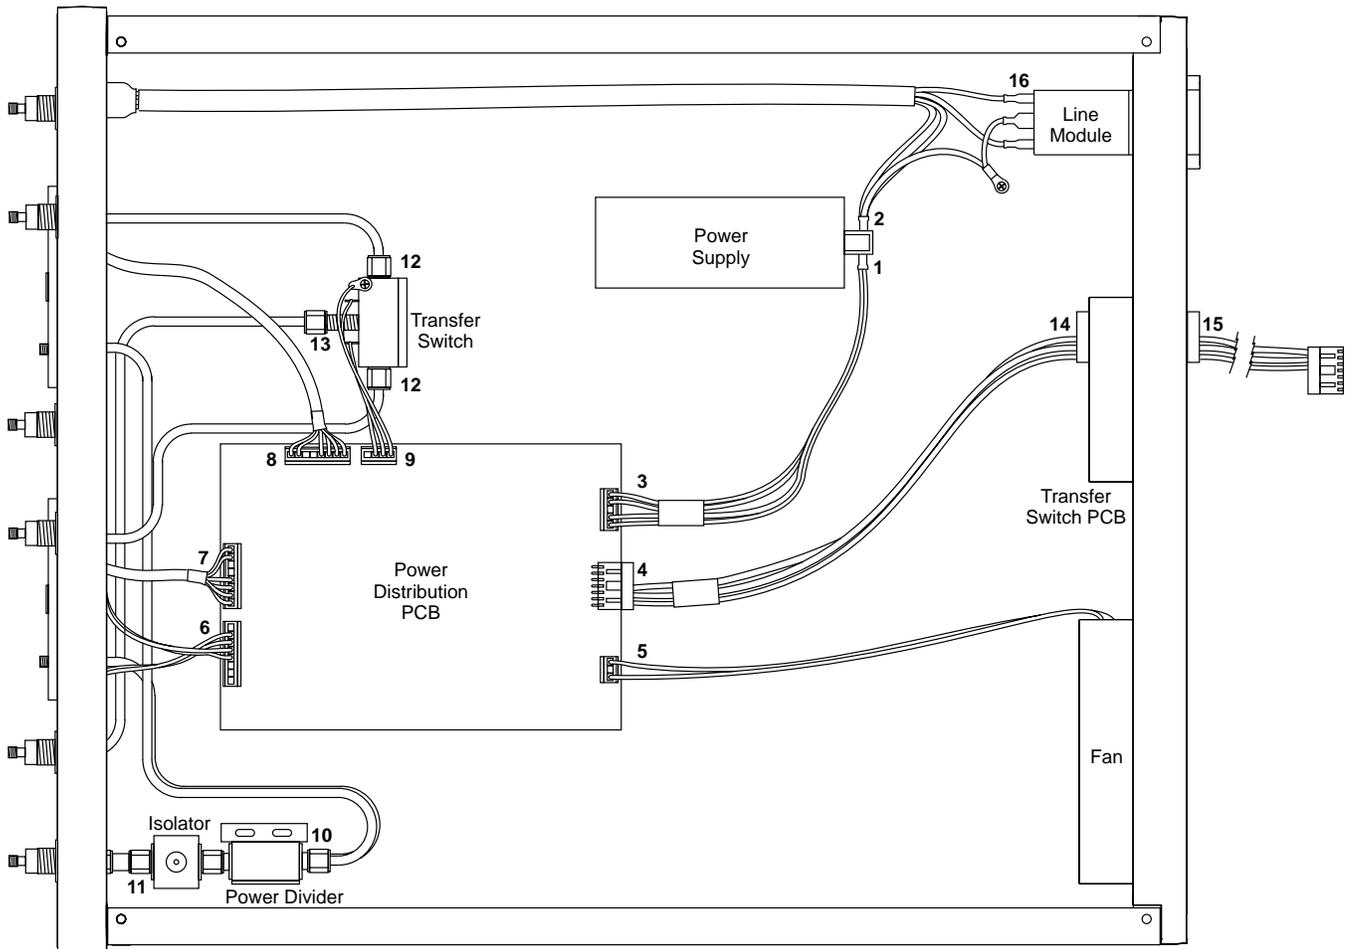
Wiring and Connectors on Replaceable Part (Keyed to Removal Procedures)
